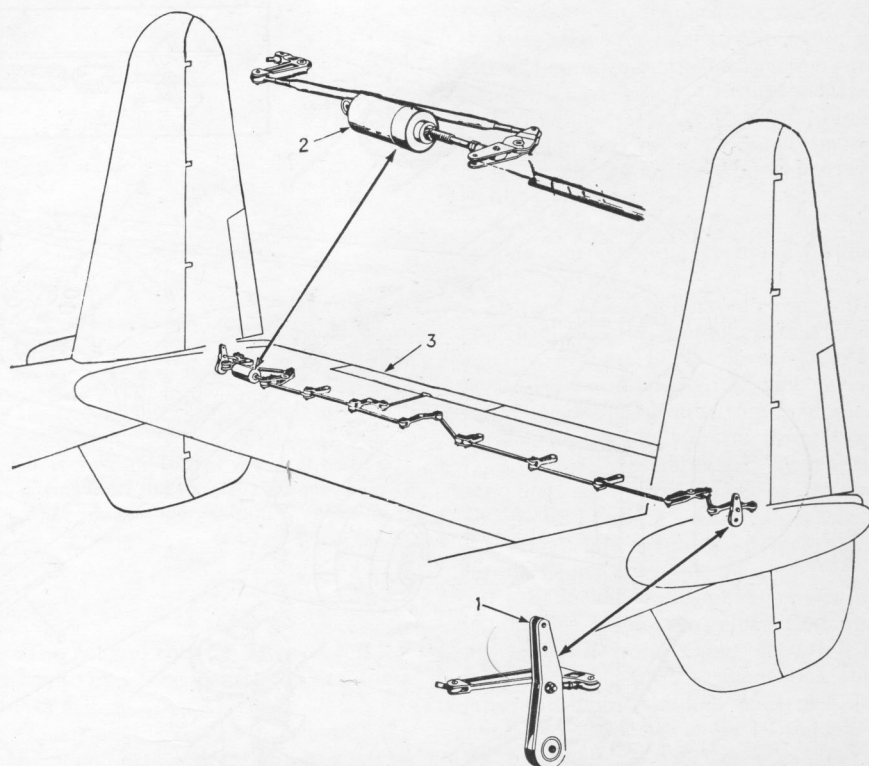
Elevator spring tab mechanism: (1) horn; (2) spring cartridge; (3) spring tab (trim tab is adjacent). The spring permits free movement of the elevator horn for $7\frac{1}{2}$ deg either side of neutral, and in this range the spring tab functions to actuate the surface.
